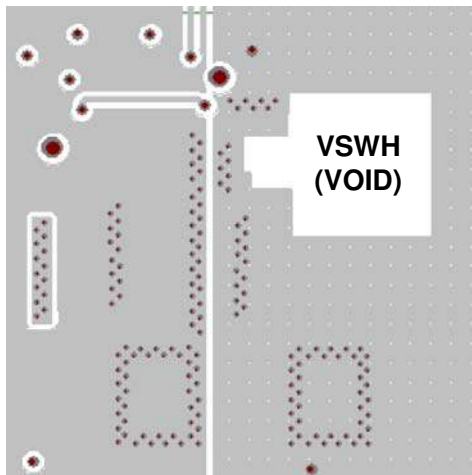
Bottom Layer PCB Layout with VSWH Copper Plane Voided on Descending Layers
